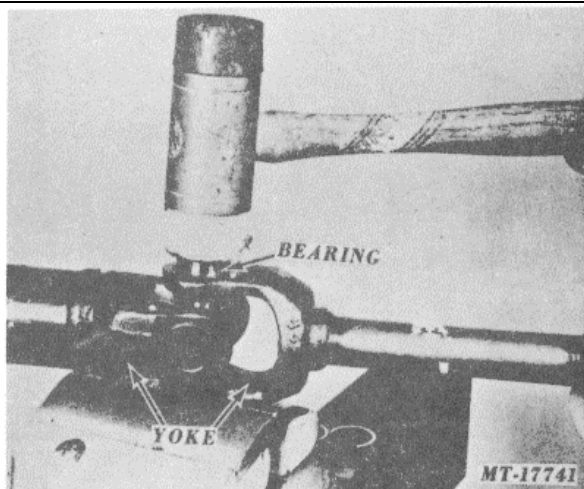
Start Bearing by Tapping with a Soft Hammer
